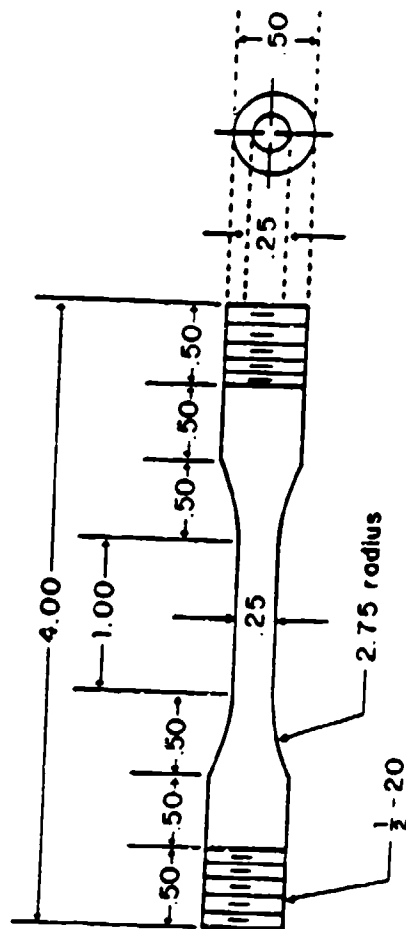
Uniform Gage-length Tensile Specimen Dimensions
